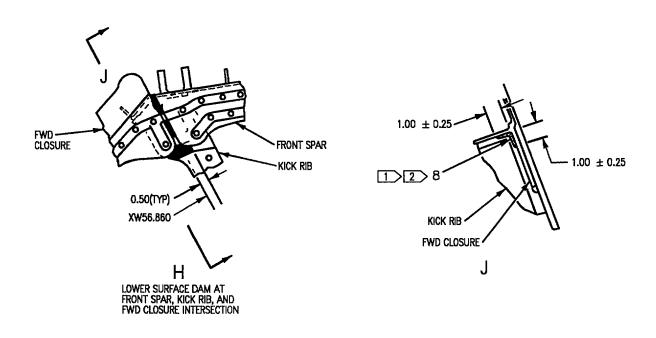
Wing Fuel Tank Sealing (Sheet 4)
